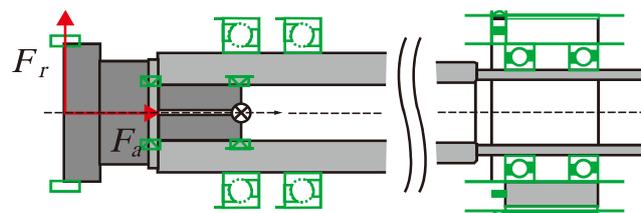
Bearing arrangements of motorized spindle (not to scale)
